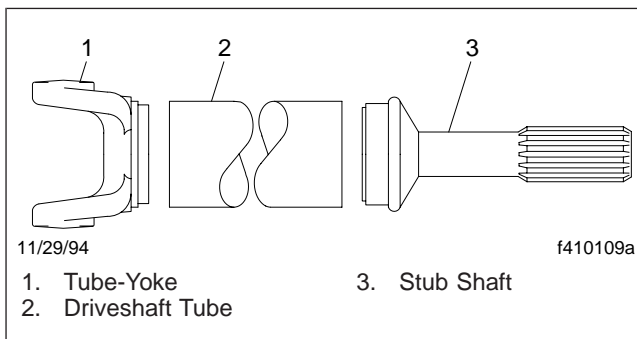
, Driveshaft Tube, Stub Shaft, and Tube-Yoke
